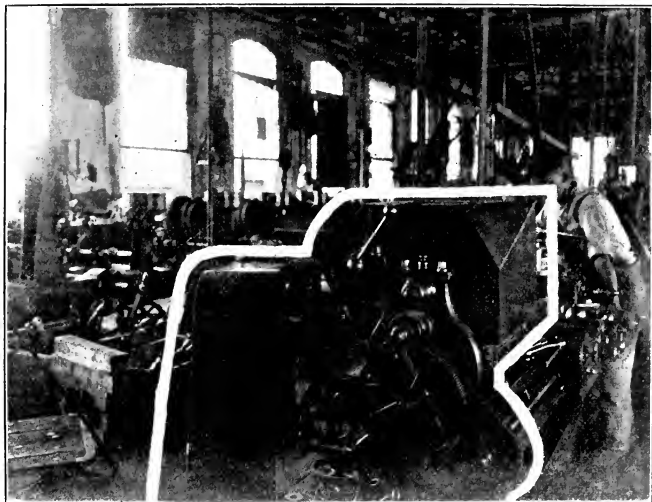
Illustration No. 27. Lathe with change gears and cone pulley guarded. Gear guard open.
